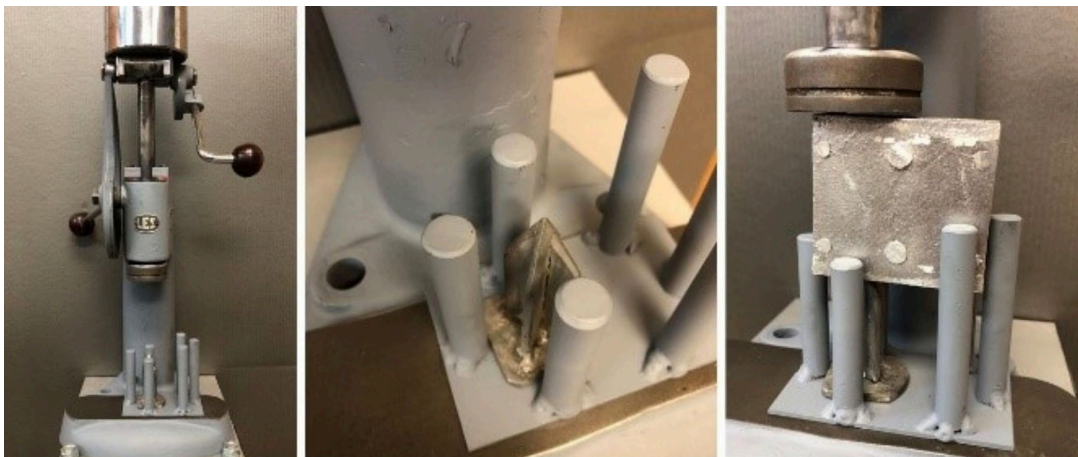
Special equipment for removing the cores from the casting – determination of the collapsibility of the cores after casting
